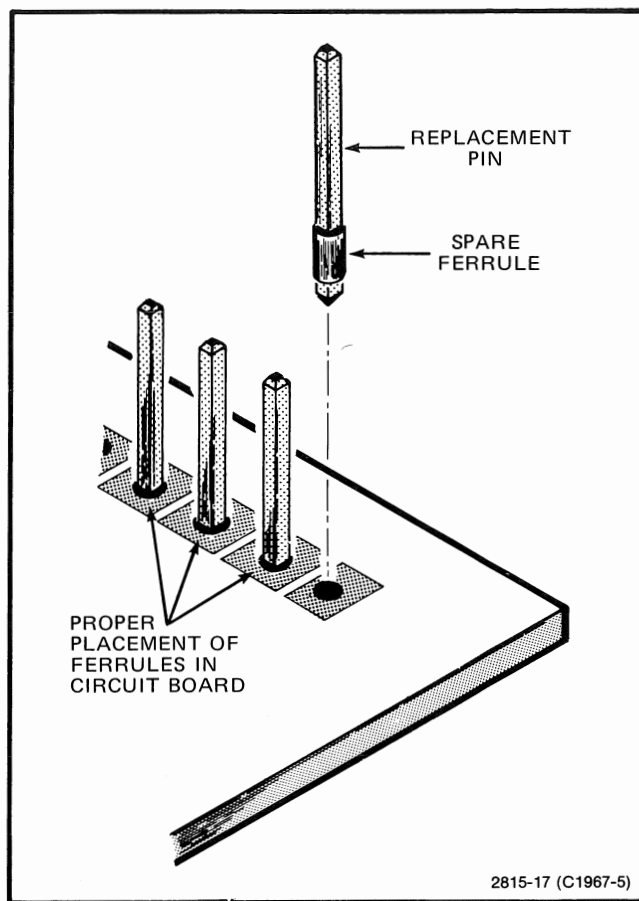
Exploded view of circuit board pin and ferrule.
